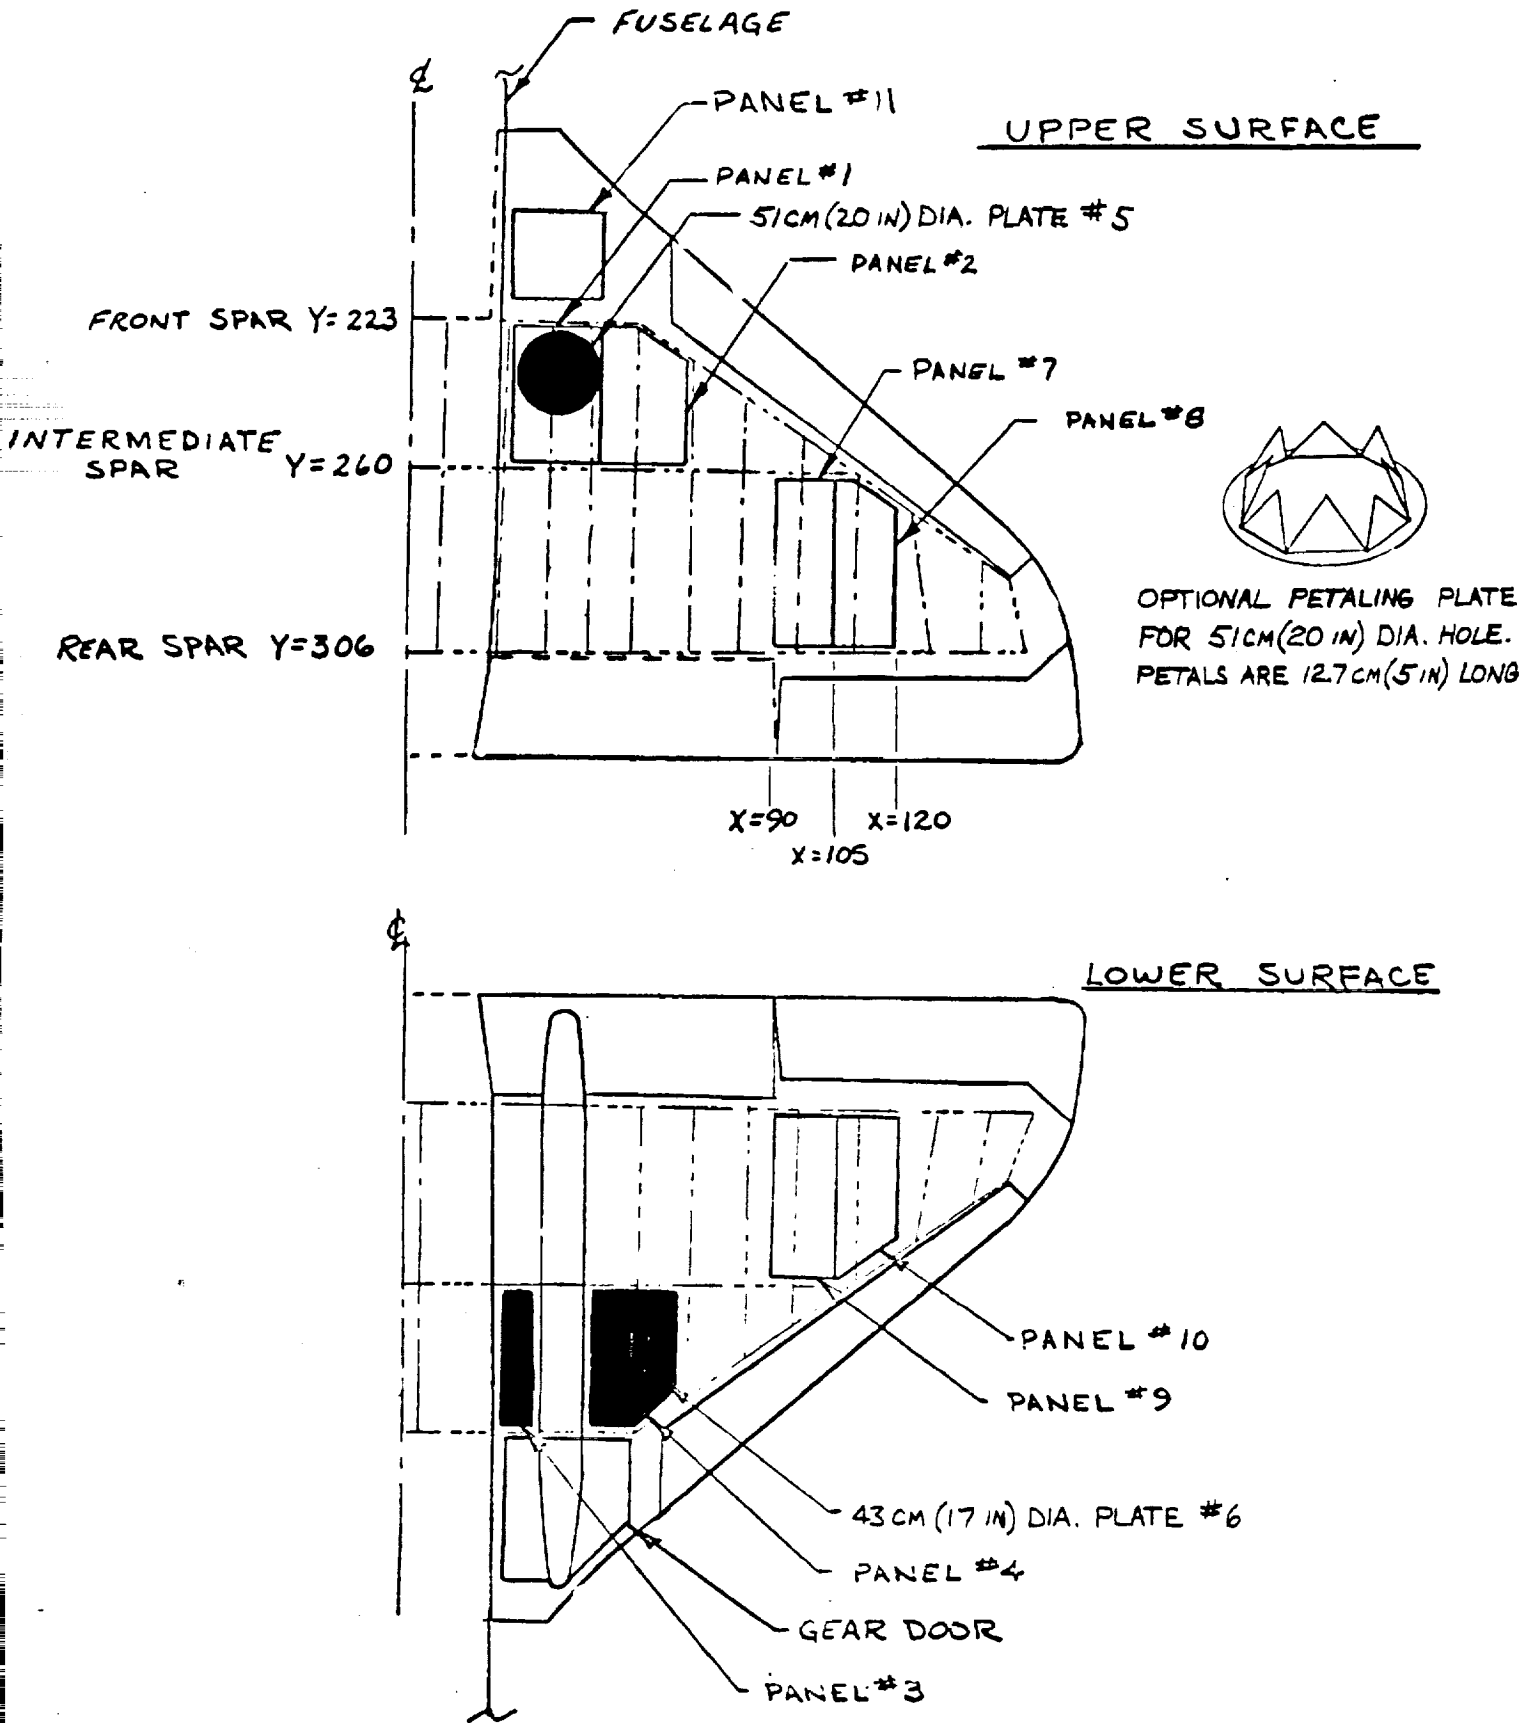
HOLE CONFIGURATION #1. PANELS 3&4 AND PLATES 5&6 REMOVED
